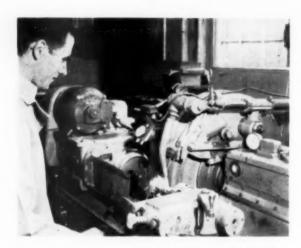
A single-contact gage is positioned on the work on a six-inch cylindrical grinder.
